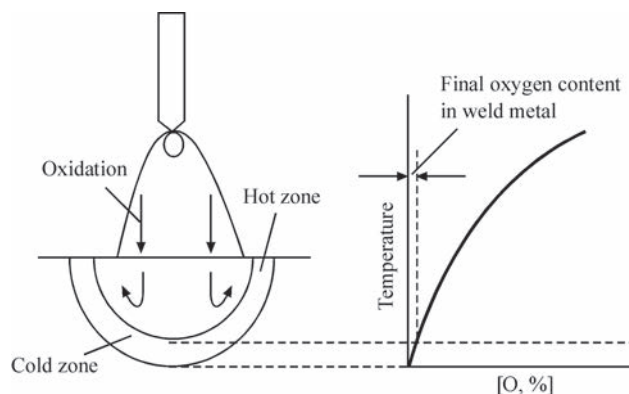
«Hot» and «cold» zones of the weld pool
